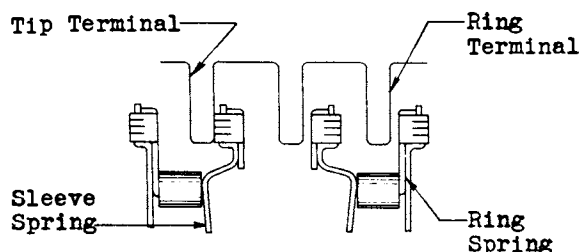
Showing That a Clearance Should Still Exist Between the Ring Spring and its Associated Terminal, When the Brush Springs Are Pressed to the Left Until the Back of the Sleeve Spring Makes Contact with the Tip Terminal.
